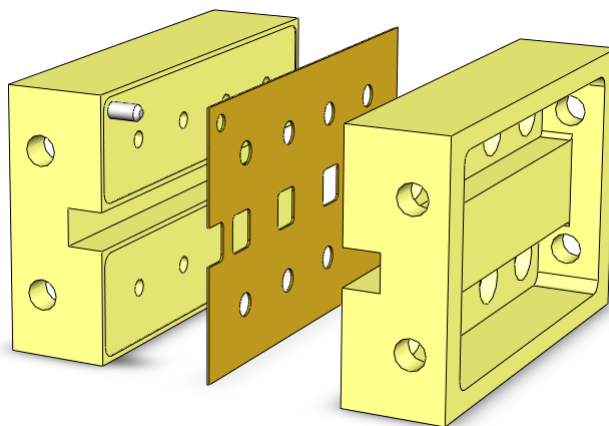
Mechanical model of the WR28 metal insert filter. A split block technique with yellow chromated aluminium is used. The brass sheet in the middle is gold plated.
